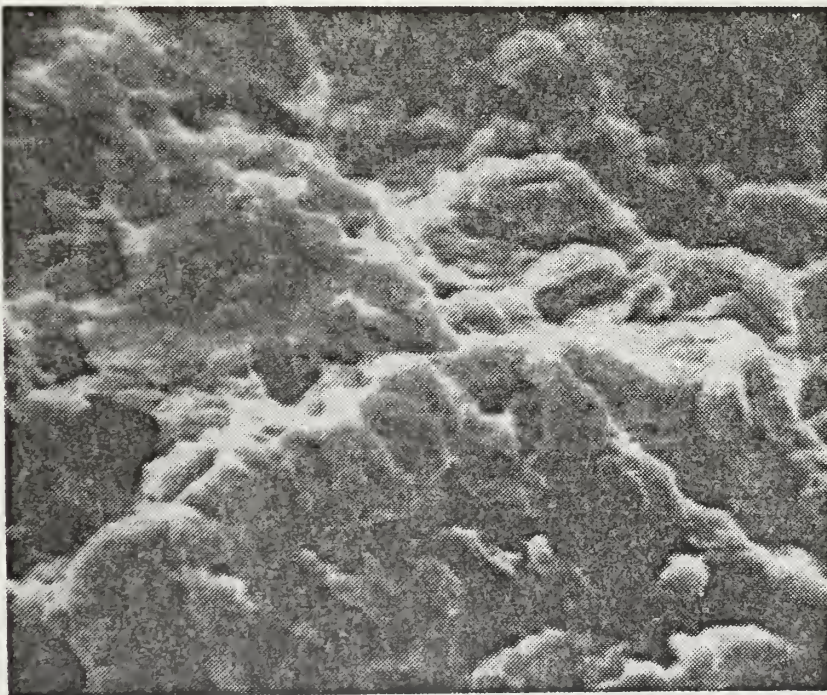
Higher magnification view of Fig. 84 fractograph showing tear ridges in quasicleavage fracture surfaces. X5000.
